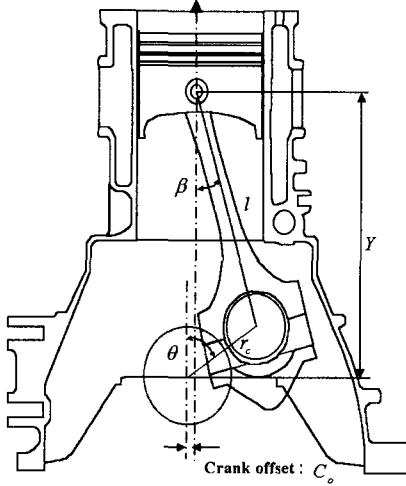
Schematic diagram of piston - crankshaft assembly with crank offset
